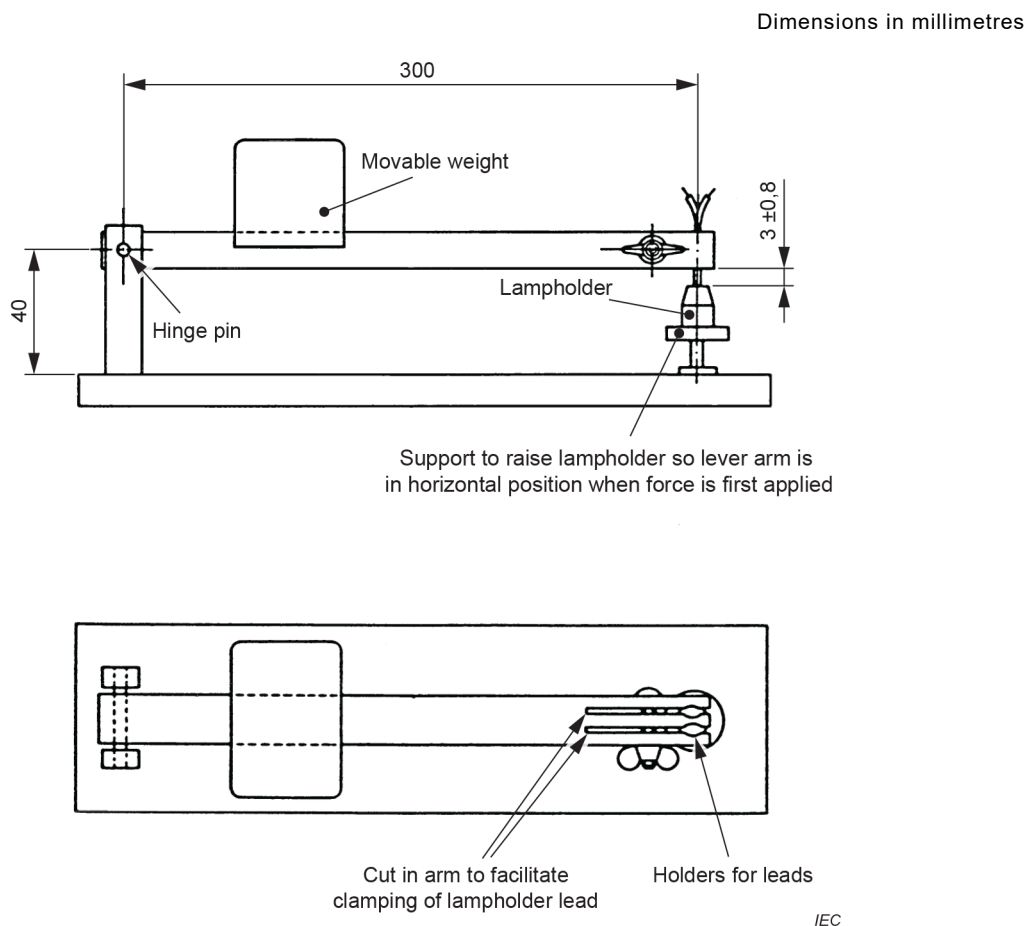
Example of test device suitable for checking security of lampholder contacts
